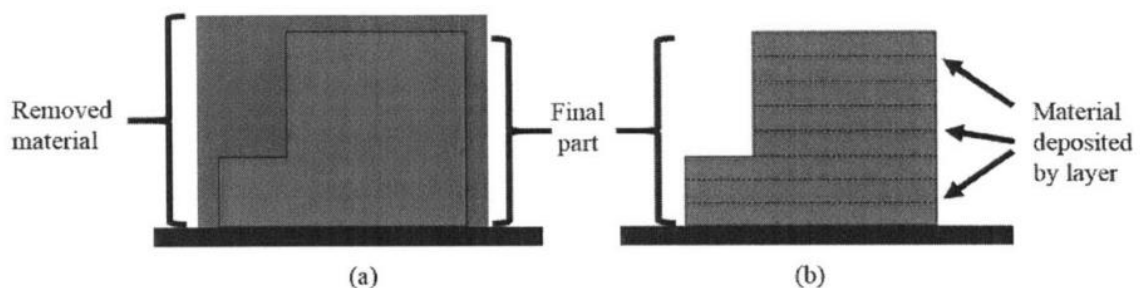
Subtractive manufacturing (SM) technologies carve a final part from a stock geometry of material (a) while additive manufacturing (AM) technologies deposit material in prescribed locations to build the final part (b) [63].
